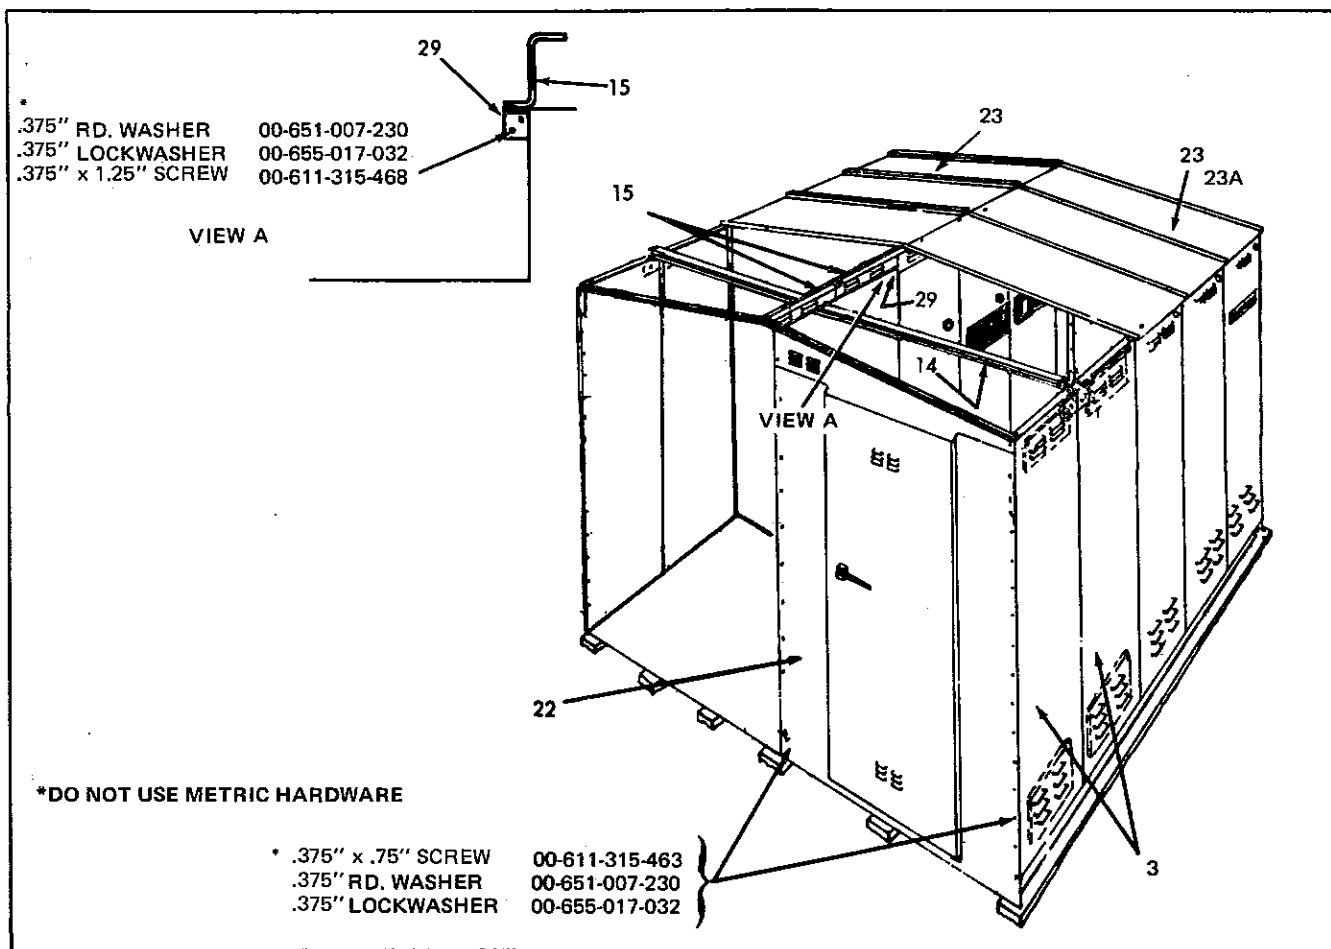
Door and Roof Support Installation (15 kV) - Single Aisle with Work Space
